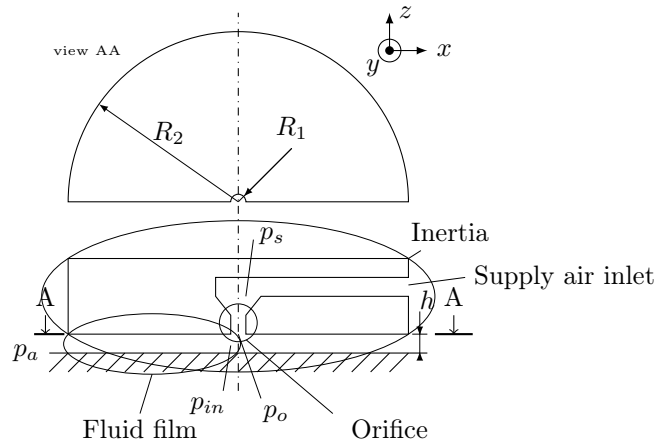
Schematic drawing of a flat single hole orifice thrust bearing.
